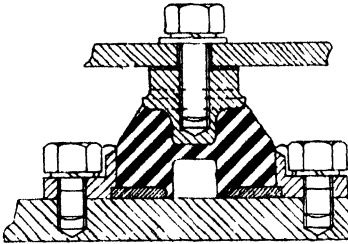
CONE COMPRESSION TYPE ENGINE MOUNTING
